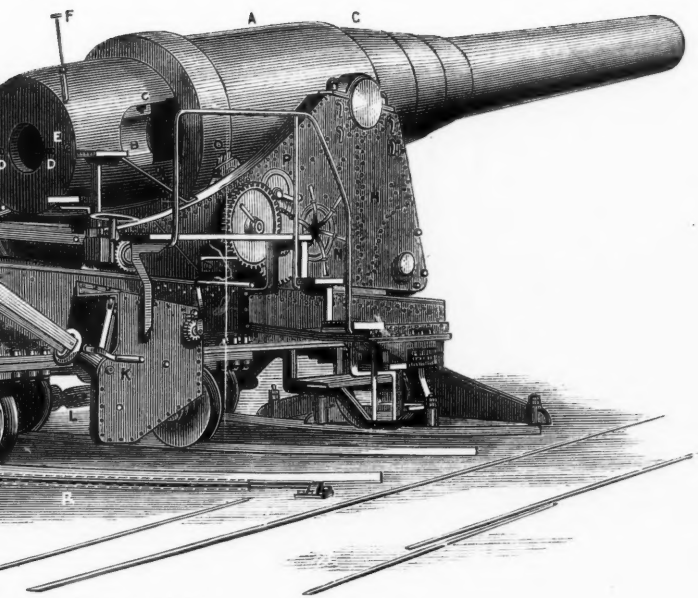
16 IN. (71 TONS) GUN MOUNTED ON COAST.
